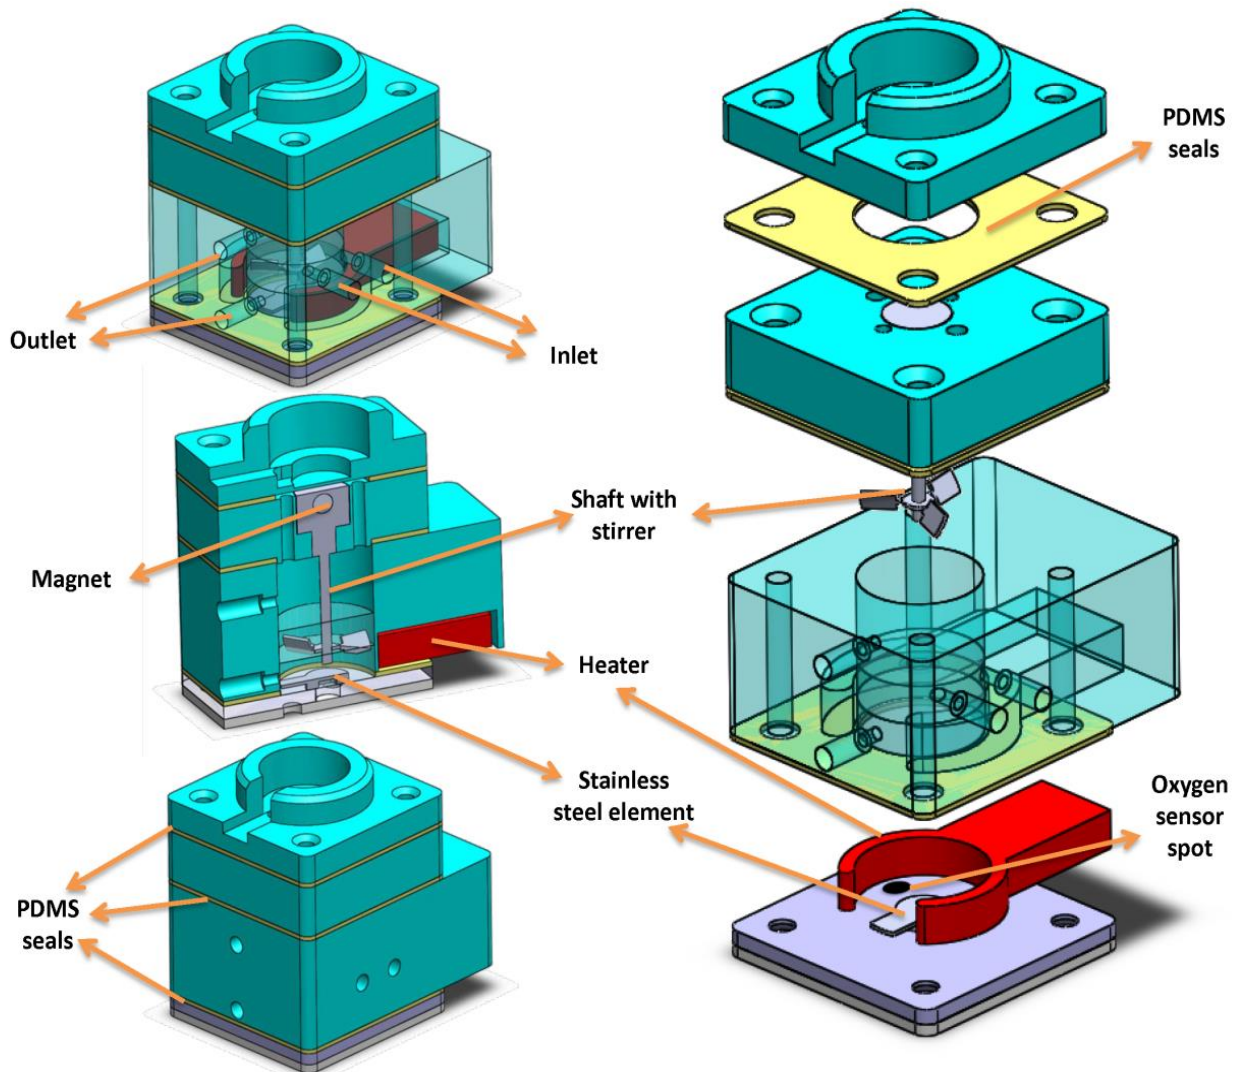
The MSBR prototype II - assembly, cross section and exploded view (Dassault Systèmes SOLIDWORKS Corp., DTU licence). The milliliter scale bioreactor had two inlets and two outlets (for medium and air), a magnet attached to the shaft and stirrer, DO sensor spots, a stainless steel element for OD and T measurement and a heater. PDMS layers were used between PMMA blocks for sealing purposes.
